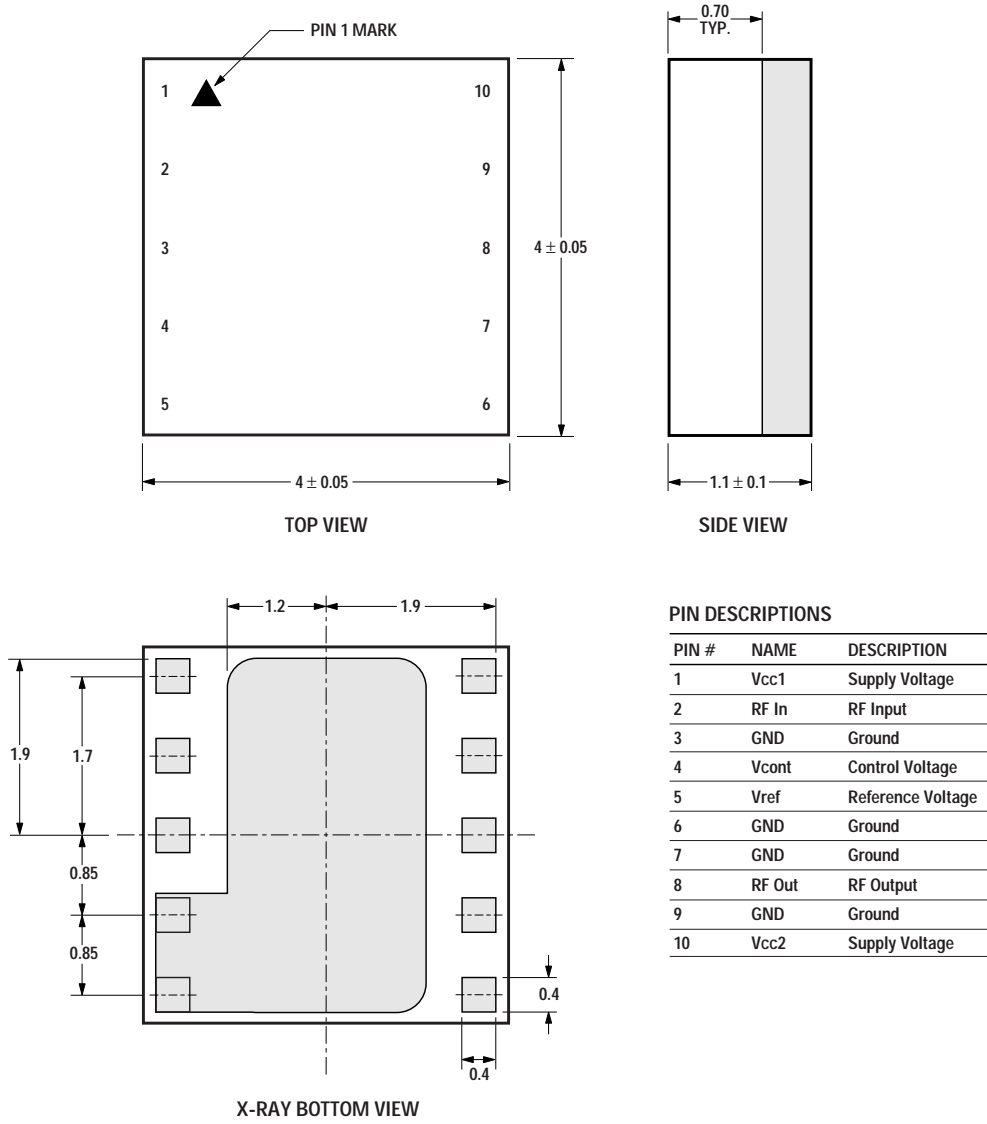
Package dimensional drawing and pin descriptions (all dimensions are in millimeters)
